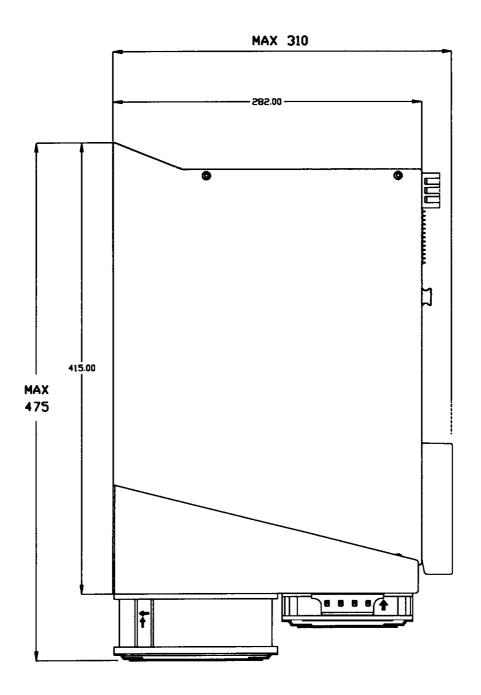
and 1.2 (dimensions in mm) show the drilling jig between power supply and drive module. The modules must be mounted vertically, with the fan housing at the bottom. Leave a clear space of at least 50 cm (19.7 in) over and under the system for air circulation.
